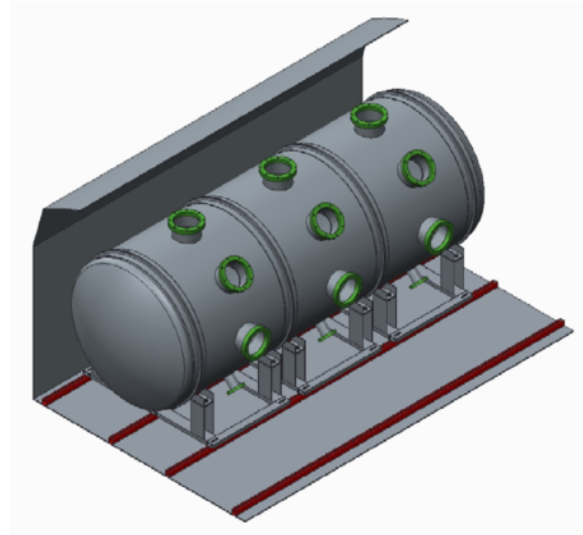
CAD rendering of the baseline ASEC design, shown inside a cutaway of the Falcon 20 cabin.
